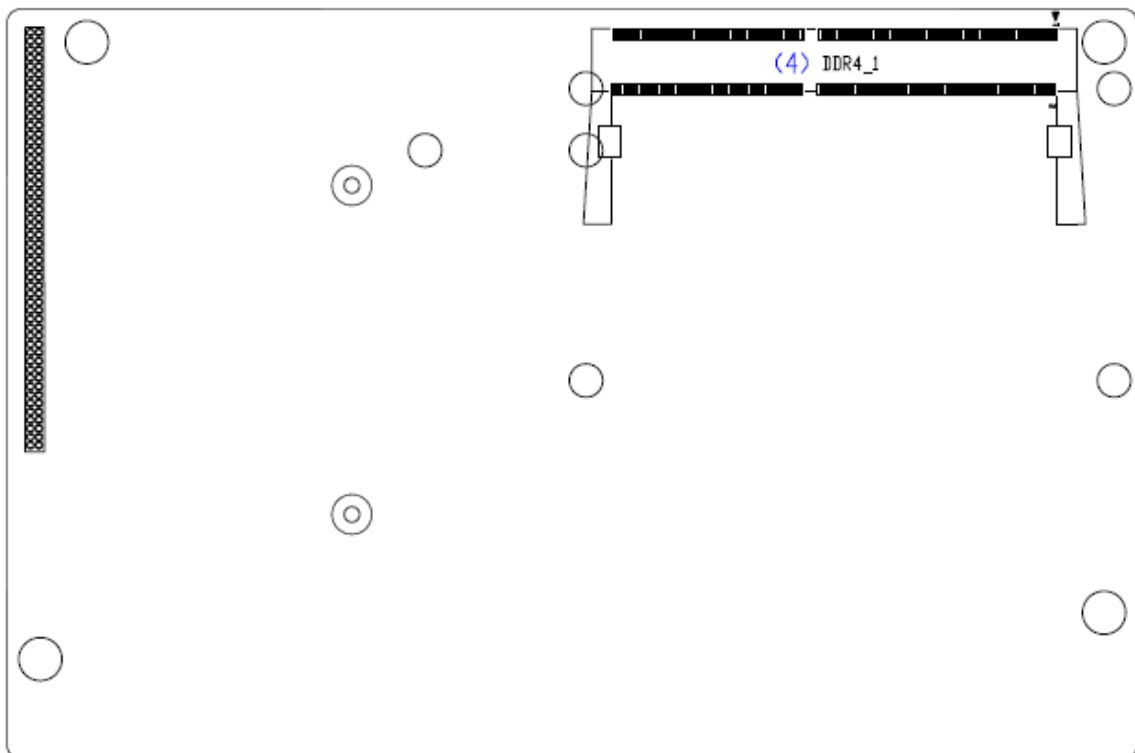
Jumpers and Connectors Location- Board Bottom
